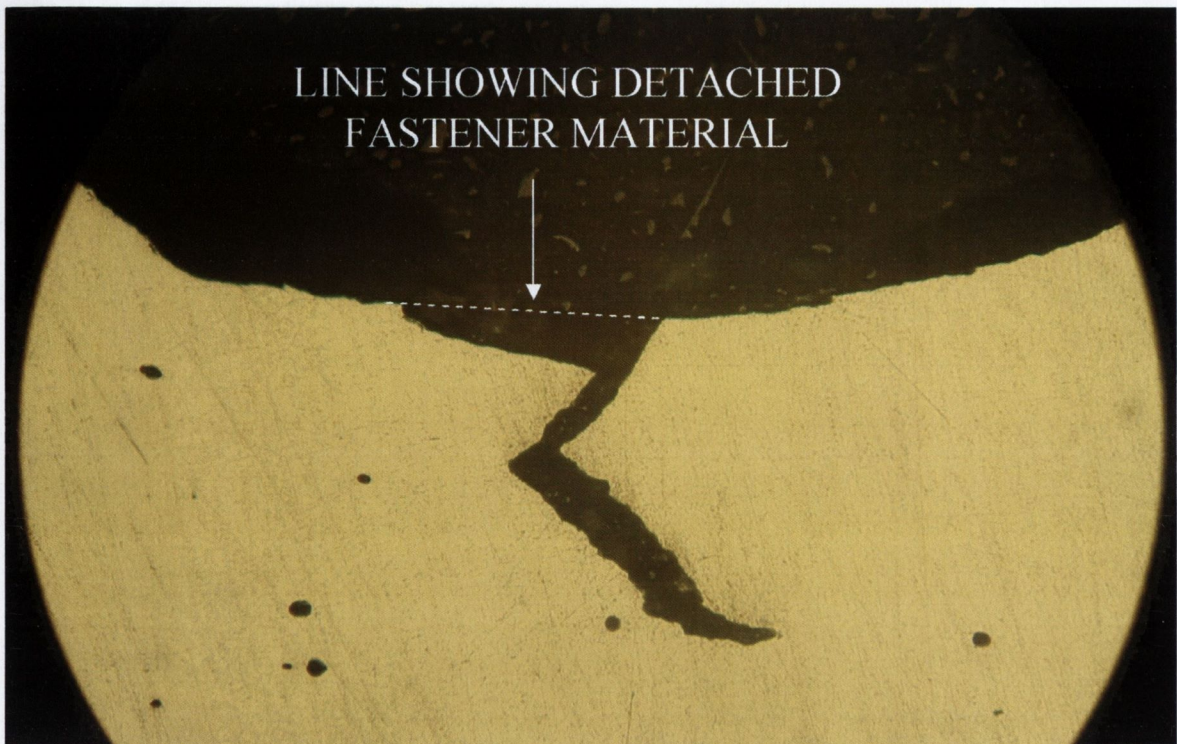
Photograph of a cross-section of the second groove showing a crack and illustrating missing fastener material. (x100)
